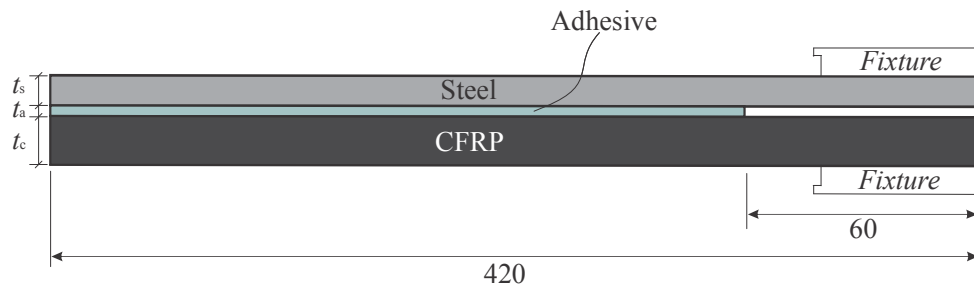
Geometrical configuration and dimensions (in mm) of the DCB-UBM specimens.
